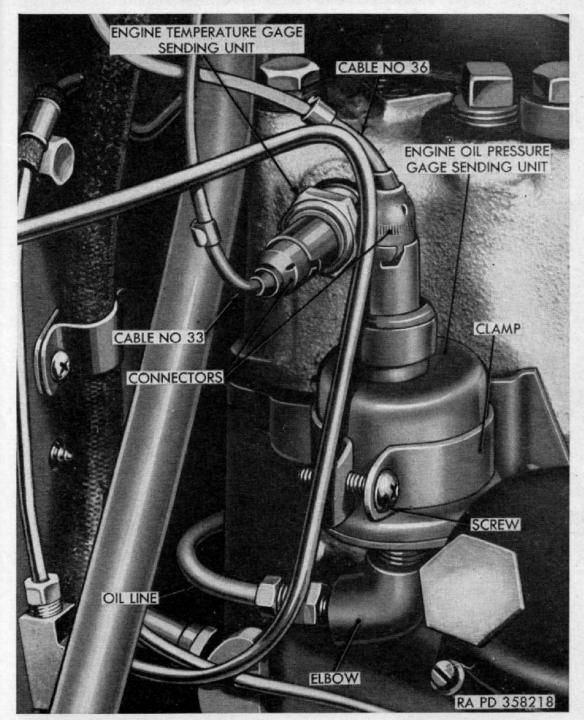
Engine temperature gage sending unit and engine oil pressure gage sending unit installed.
